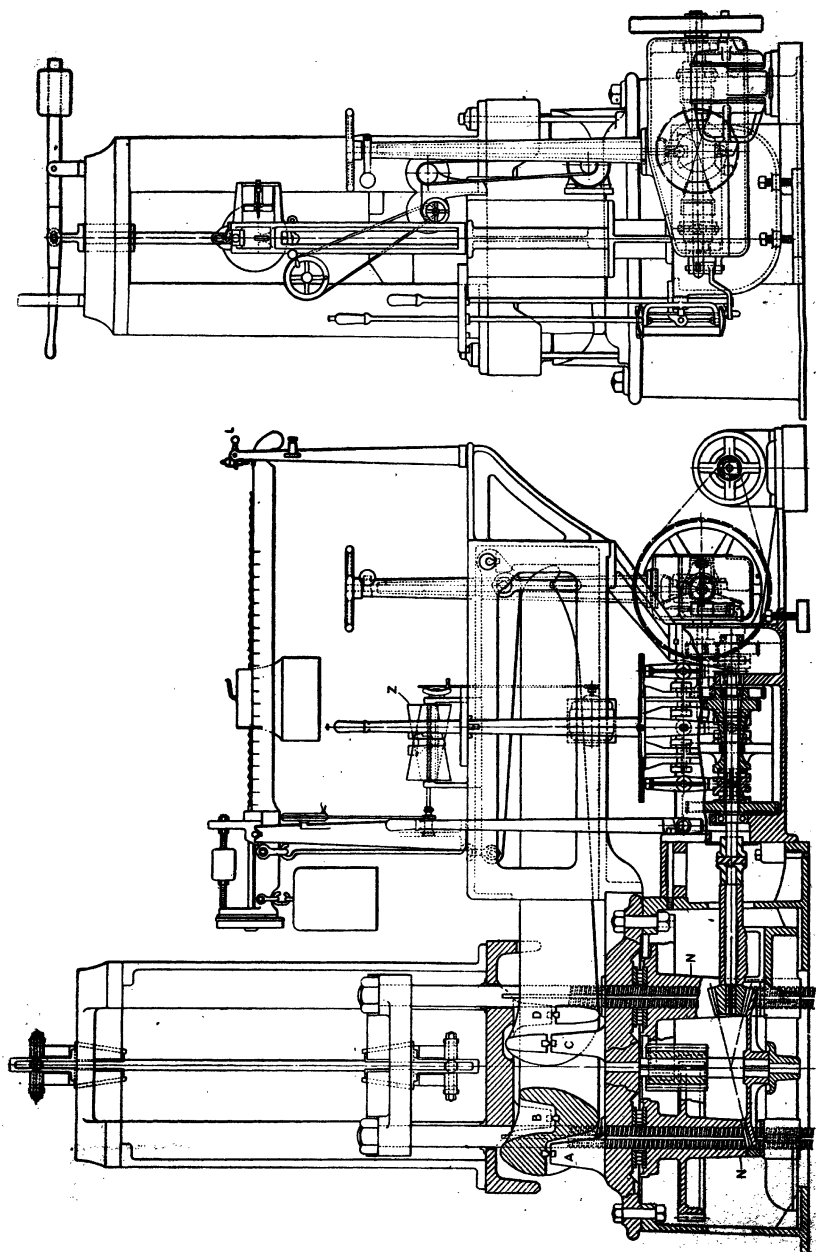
ELEVATION AND SECTIONAL VIEWS OF OLSEN MULTIPLE-LEVER TESTING MACHINE
